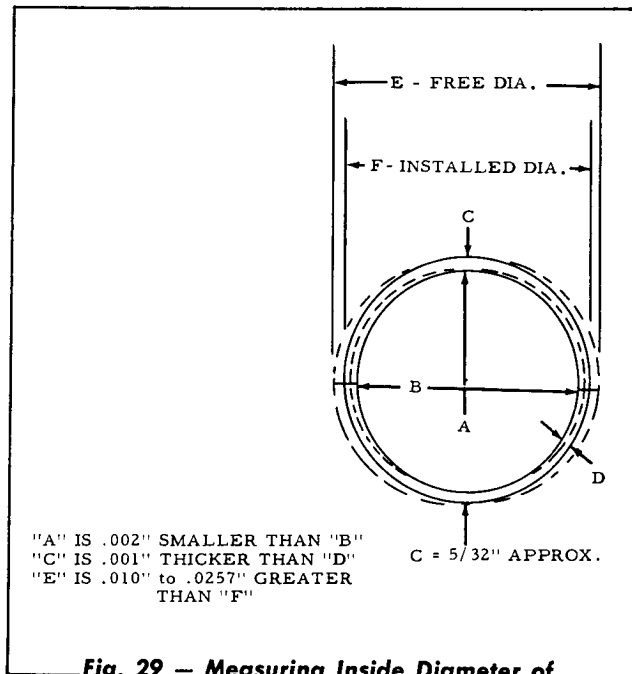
Measuring Inside Diameter of Main Bearing Shell
